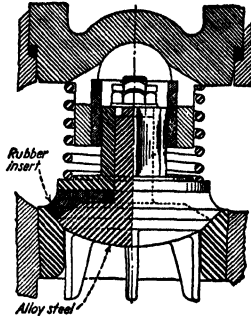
Dual-face mushroom valve with wing guides for slush pump.
